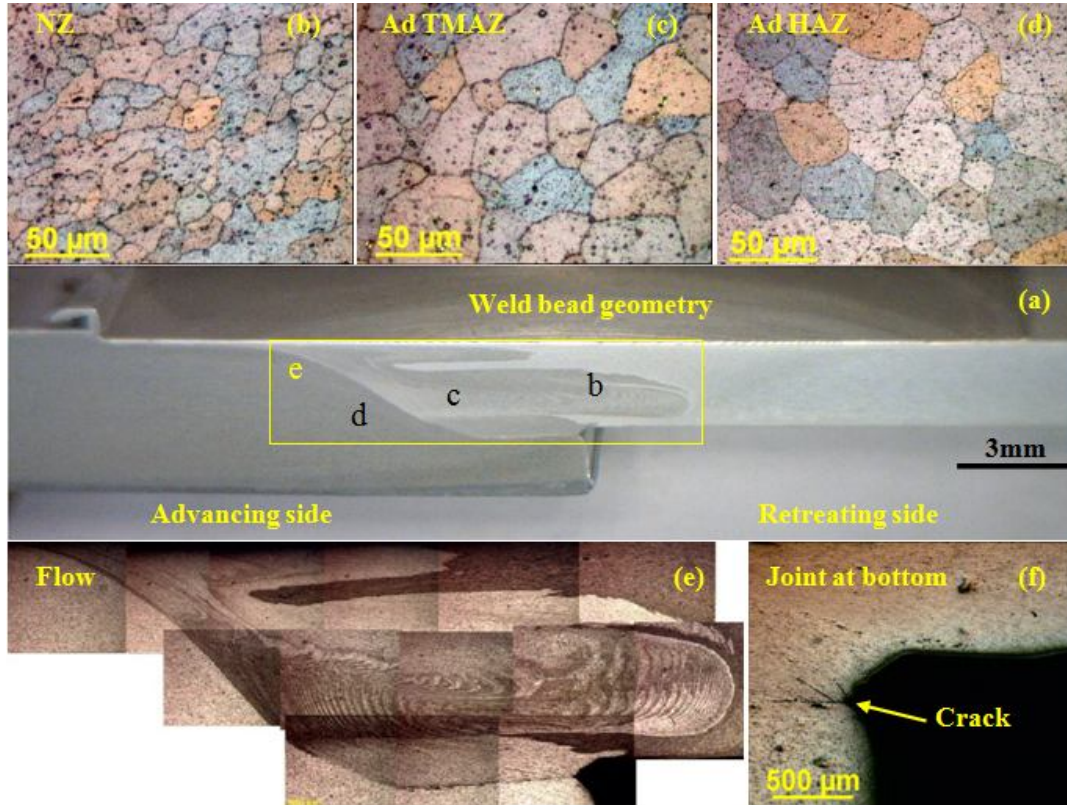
(a) Weld bead of DPBF specimen of WPDT9, (b, c) flow of material in the NZ, (d) NZ, (e) advancing side of TMAZ, (f) retreating side of TMAZ and (g) HAZ.
